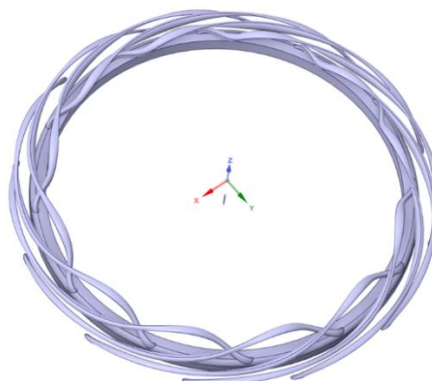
CAD of Internal Channels of Main-Shaft Rotor
